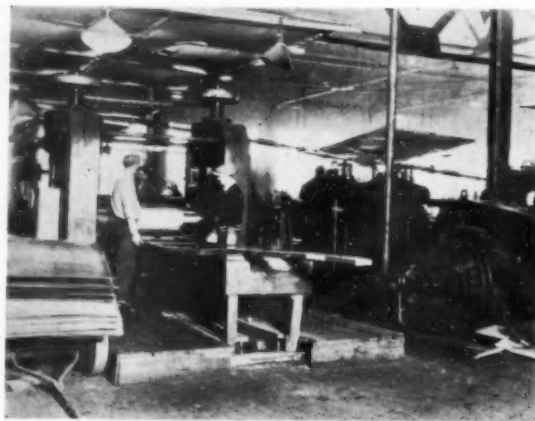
Two-high non-reversing sheet mill, operating on the finish rolling of grey plate.
